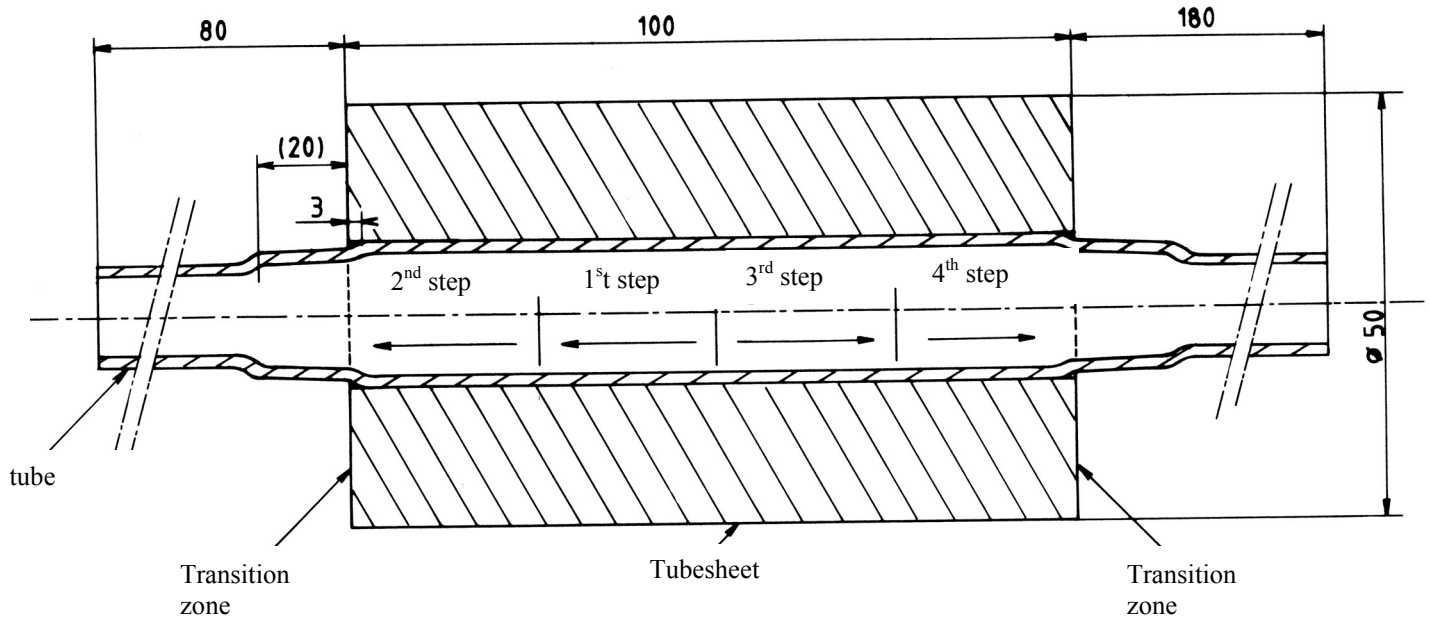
Sketch of a standard mock-up (dimensions in mm).
